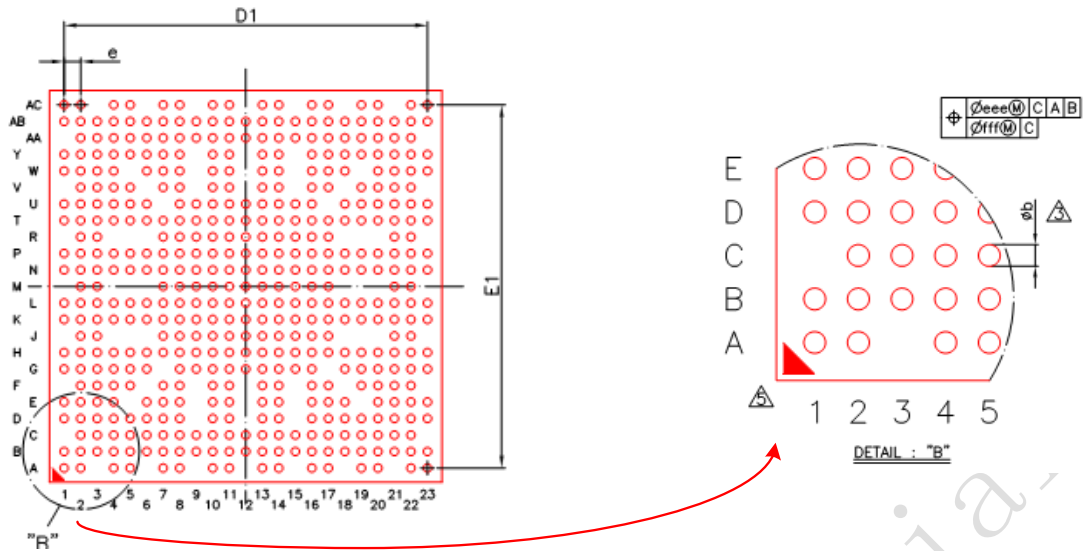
RK3066 TFBGA453 Package Bottom View
